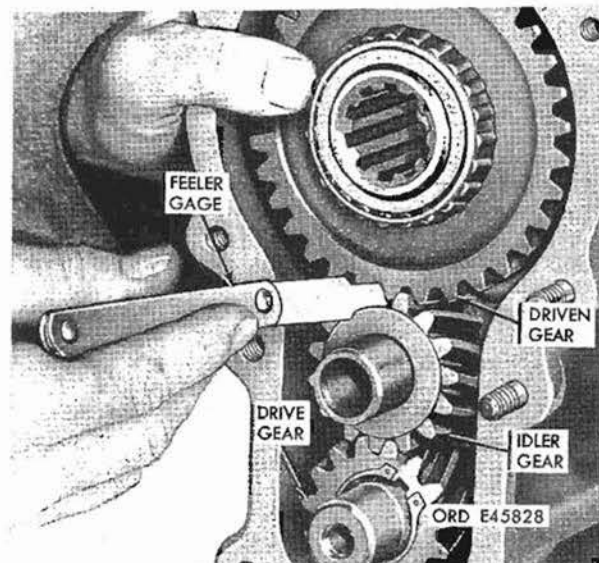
Checking backlash between helical drive gear, idler gear, and driven gear.
